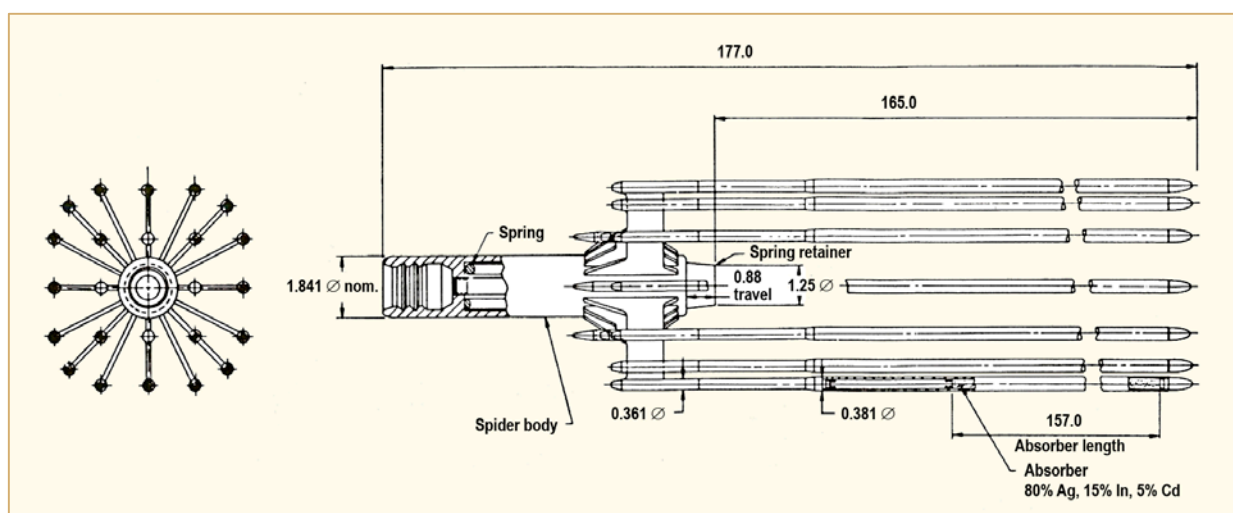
Control Assembly (CA) for Westinghouse 17x17 fuel NSSS.
